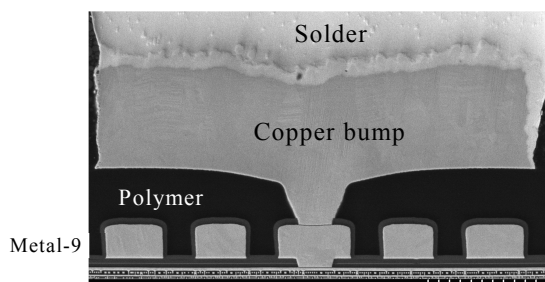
Cross-section of an assembled unit, showing solder, copper bump, and thick Metal-9 layer under bump.
